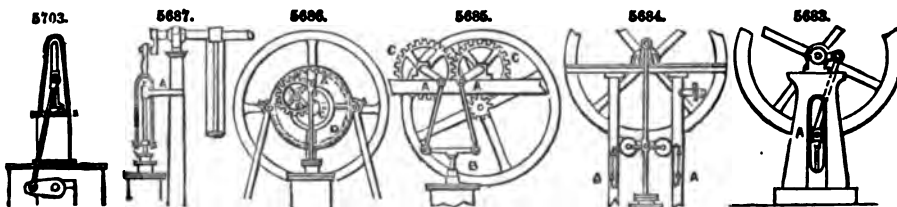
A piston-rod guide. The piston-rod *A* is connected with a wrist attached to a cog-wheel *B*, which turns on a crank-pin, carried by a plate *C*, which is fast on the shaft. The wheel *B* revolves around a stationary internally-toothed gear *D*, of double the diameter of *B*, and so motion is given to the crank-pin, and the piston-rod is kept upright.
